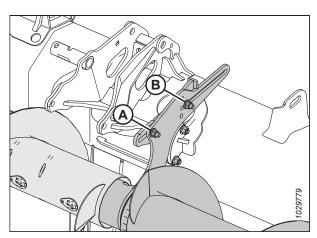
Initial Position of Adjustable Mounts – Three-Piece Auger
